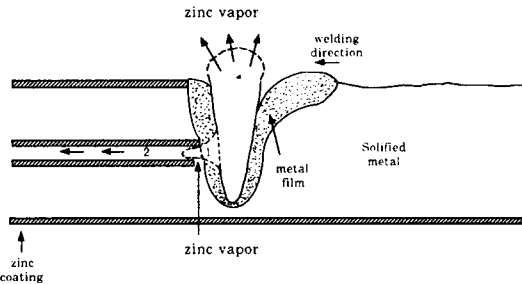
The diagram representing the welding of Zinc-coated steel sheet with a small gap at the interface between two sheets
